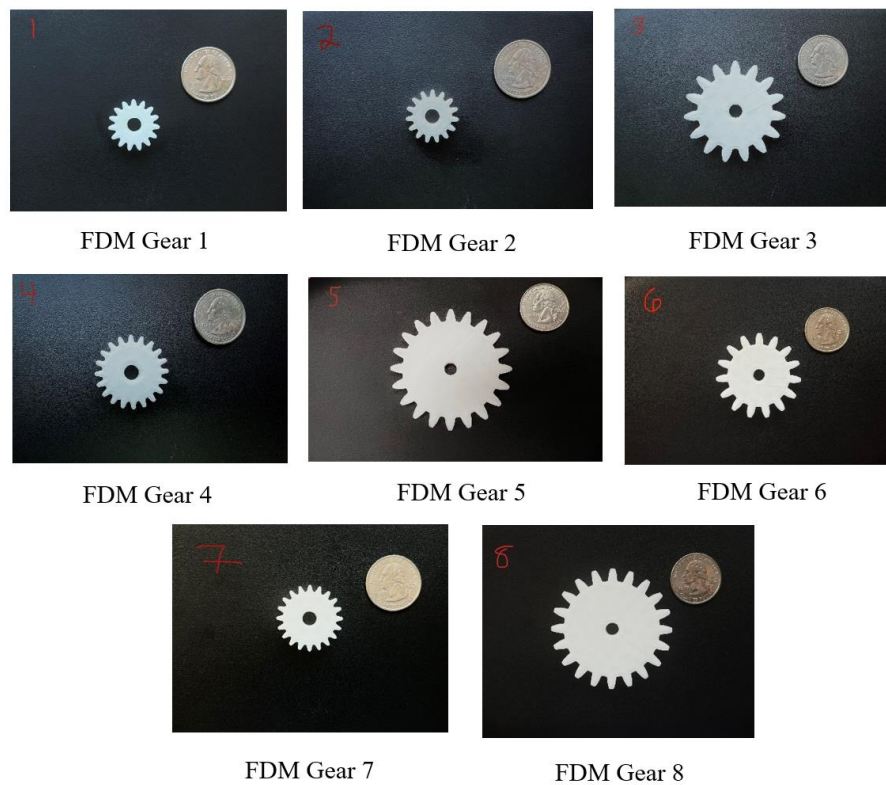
FDM Printed Spur Gears. A dime is placed to indicate the size.
